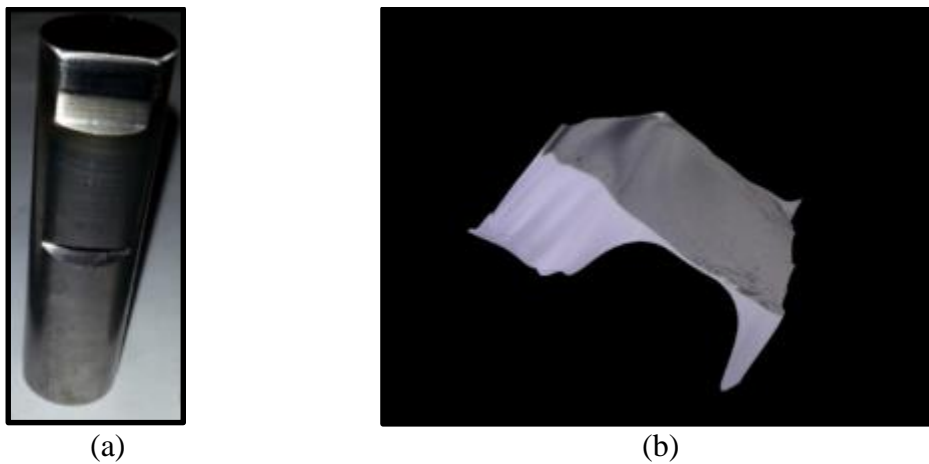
MP159 Izod Specimen (a) and 3D Representation of Fracture Surface (b)
